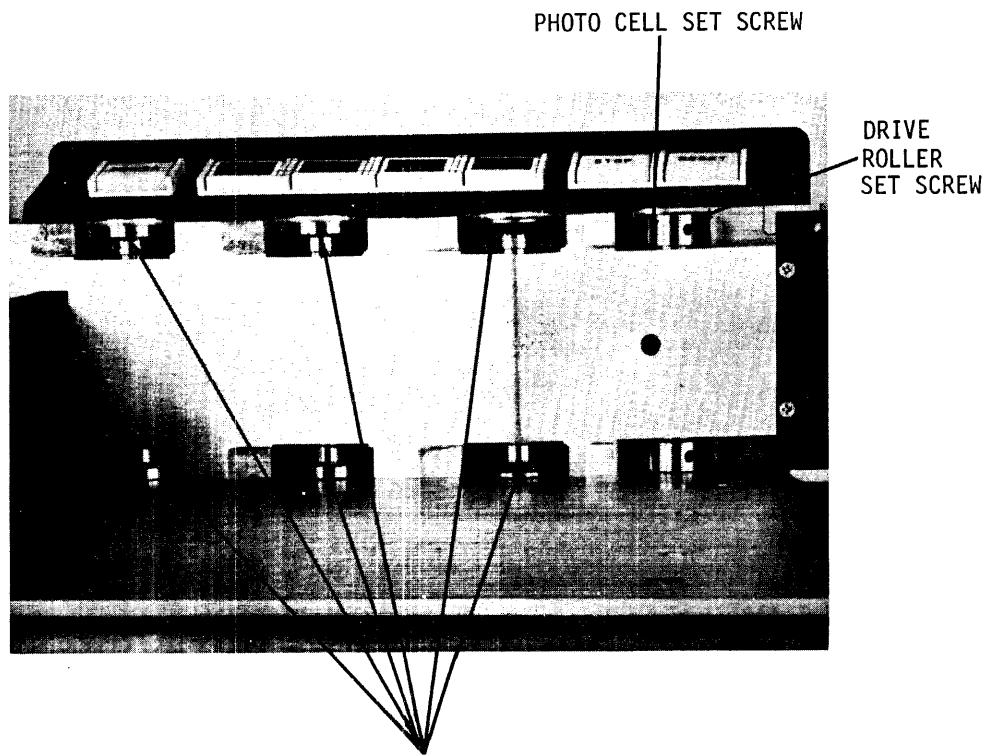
Pictorial, Stacker Roller Bearing Assembly
